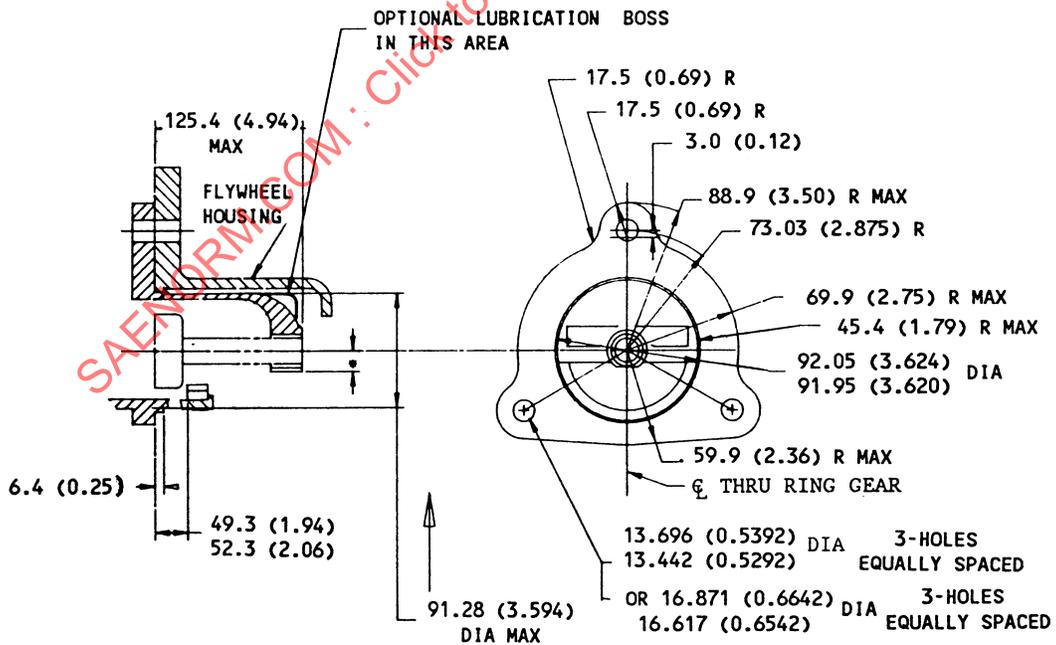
TYPE NO. 1 MOUNTING FLANGE MEDIUM DUTY
